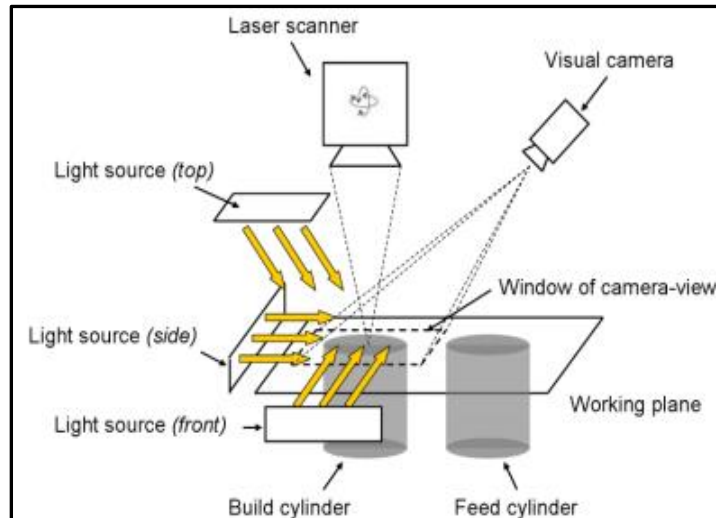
1 Visual inspection system for monitoring powder layer surfaces [18]
